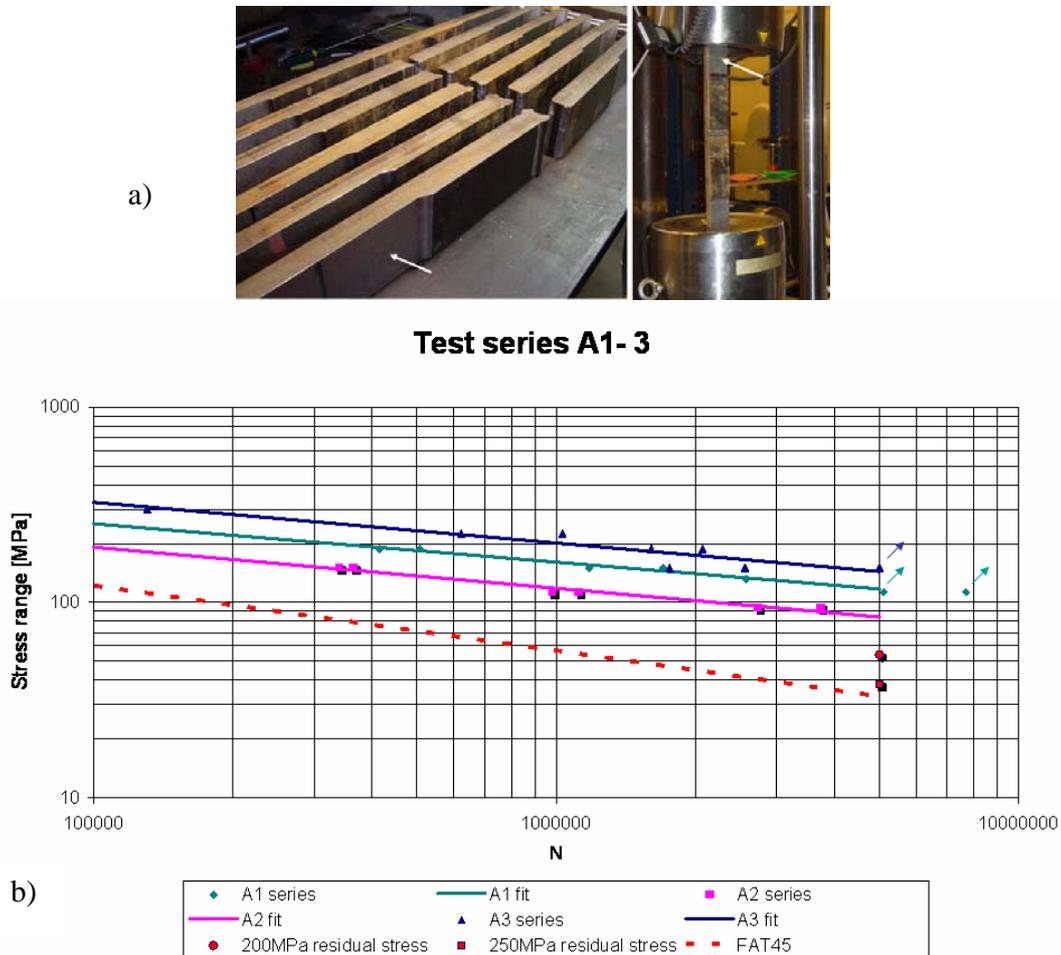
a): Specimens after failure and the test rig prepared with new specimen.
